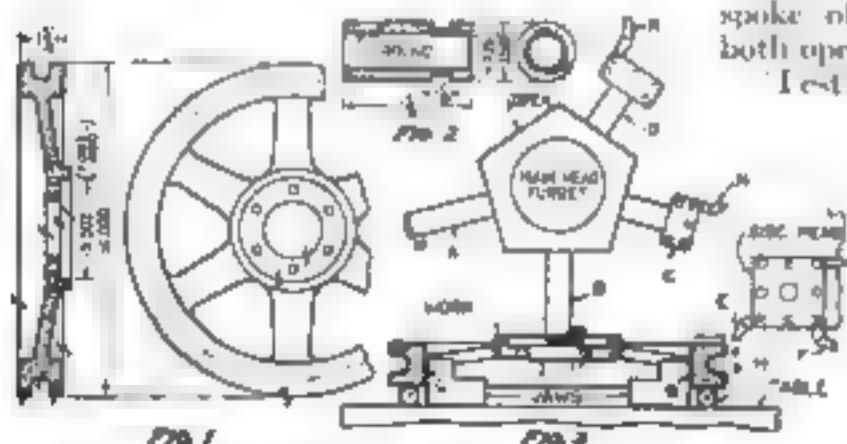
The finished dimensions of the grooved flywheel. Fig. 2. The set up for a bushing of this type can easily be altered for other similar pieces. Fig. 3. Tool set-up for machining flywheel.
